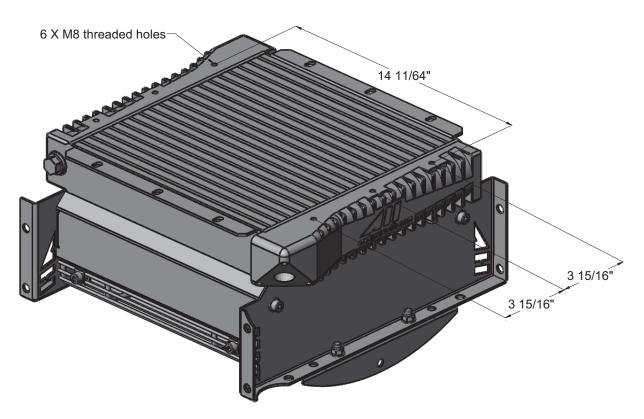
Inspect Threads and Hole-to-Hole Dimensions
